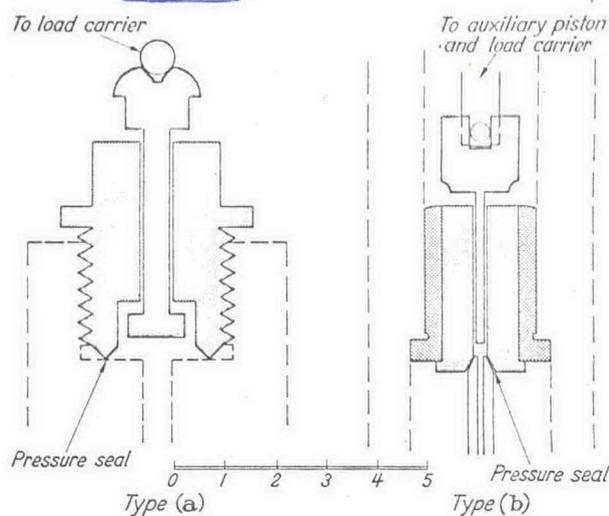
Diagrams of piston-cylinder assemblies (Scale of cm)
